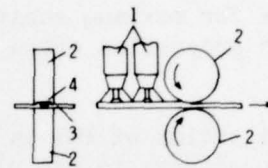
LTTMT of a Weld Seam During Continuous Cooling. Tungsten Electrode Welding with Argon (1) is Performed in Front of the Rollers (2). The Raised Weld Seam (4) of the Welded Sheet (3) is Reduced in Thickness During Rolling. (Ref. 7)
